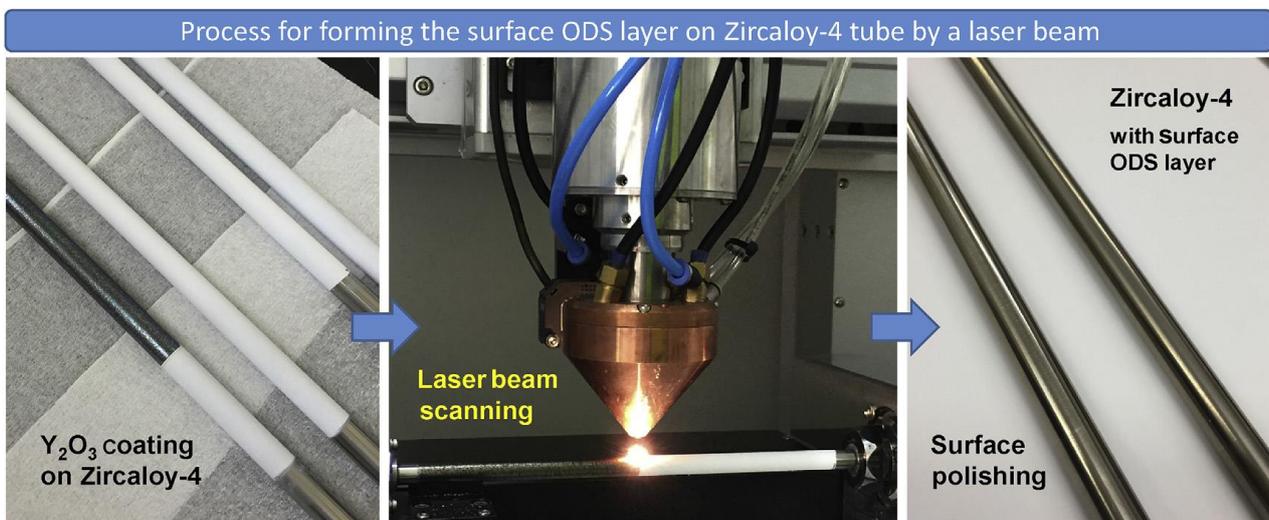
Fabrication process for forming a surface ODS layer on Zircaloy-4 tube using a laser beam [6].
